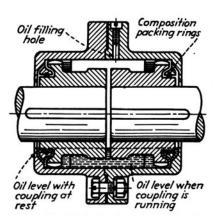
The Poole Engineering & Machine Company uses a two-piece floating sleeve with the internal gear teeth cut at each end, meshing with gear teeth on hubs. Toothed hubs are mounted at the end of each shaft. The hub teeth have spherically formed crowns. The teeth are in mesh around their entire circumference. Compensates for misalignment in all directions without the use of flexing materials. Bearing surfaces are lubricated in a bath of oil. Dust is excluded by packing ring at either end.
